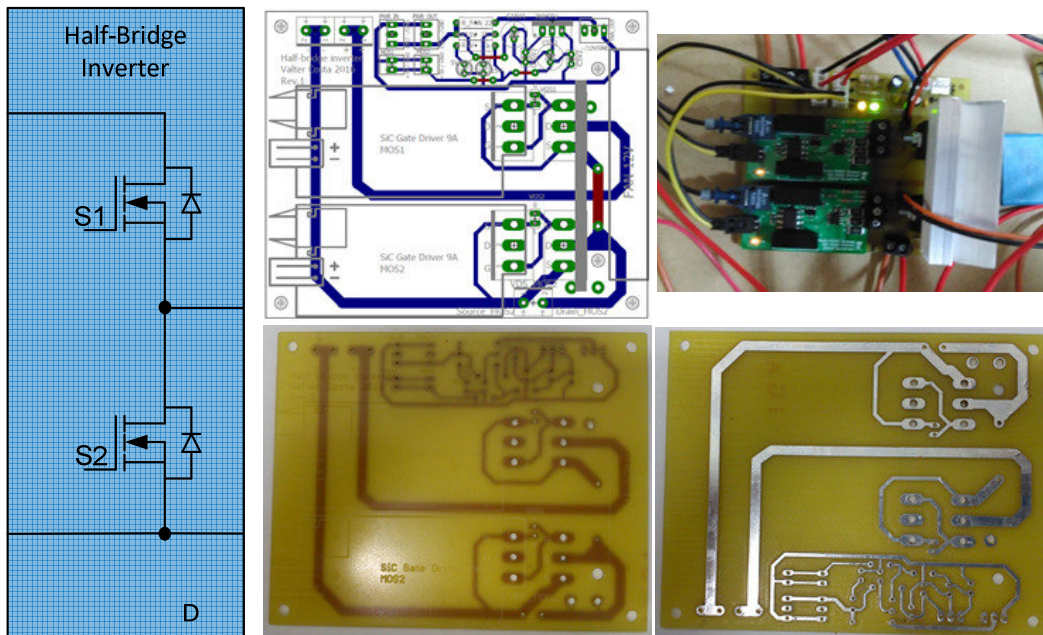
Half-bridge inverter PCB prototype (100 x 80 mm), Board design; PCB Top and Bottom Layer and PCB full assembly
